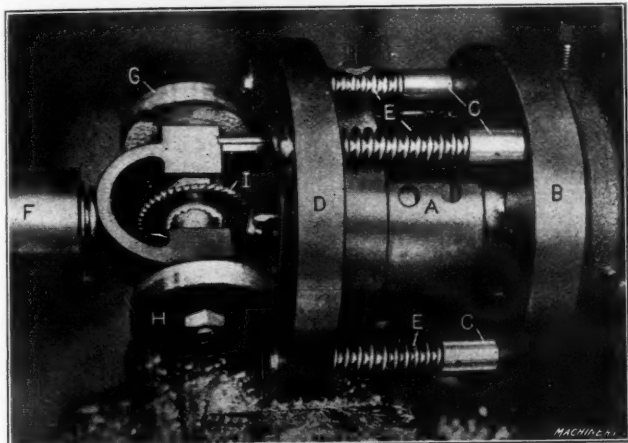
Cross-sawing Attachment for slotting the Brass Shells
